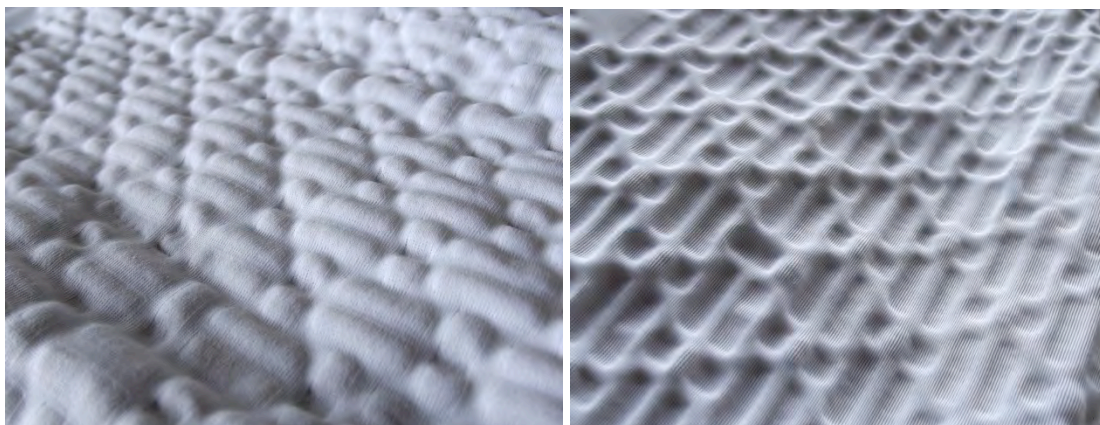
Laser Moulded basket Weave Pattern (front and back)
